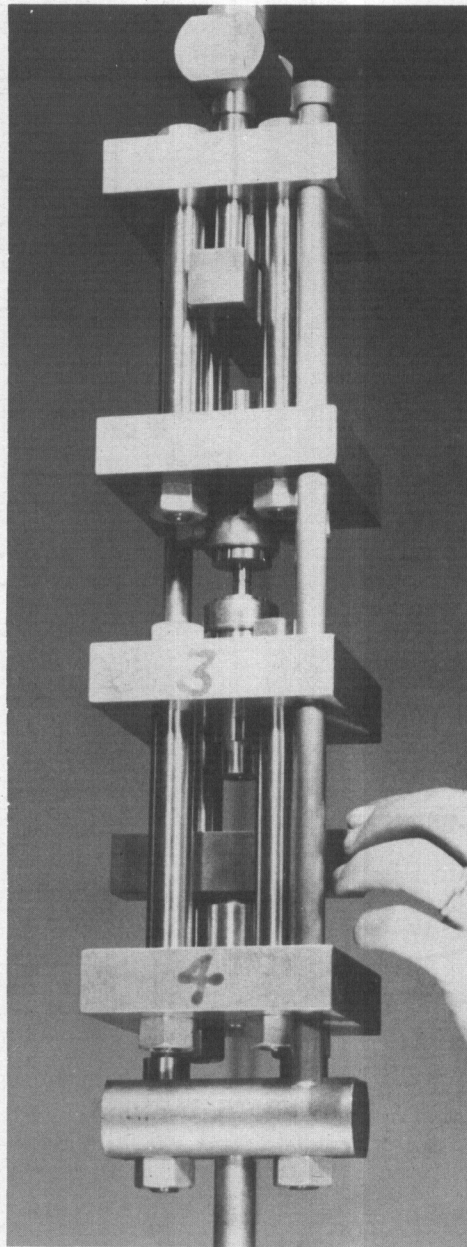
FIXTURE FOR CONCENTRIC LOADING
